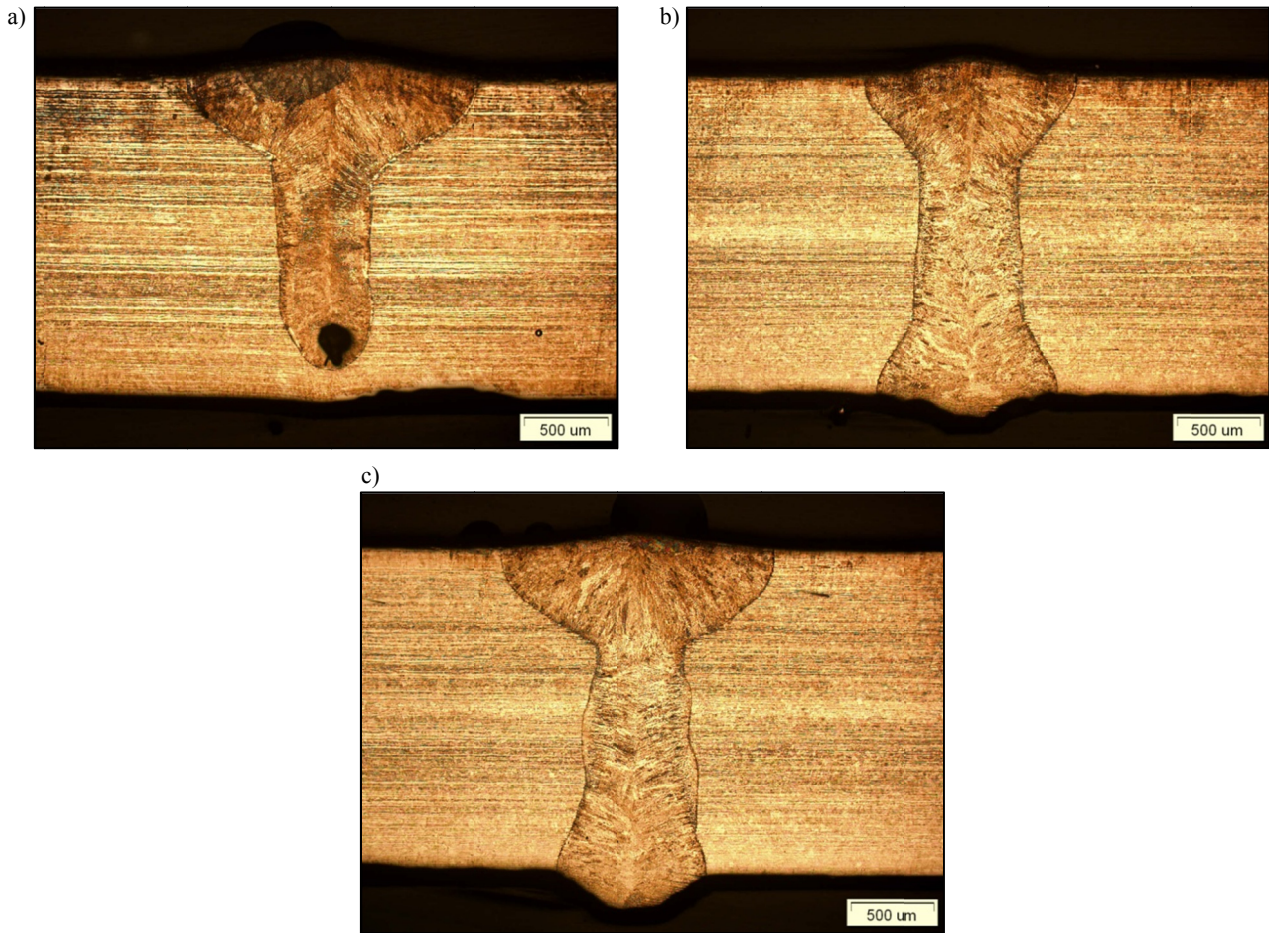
Macrostructure on cross sections of the simulated welds produced on AISI 304 steel sheets 2.0 mm thick by bead-on-plate laser welding at 1.0 kW of output power, welding speed 1.5 m/min, and different focal spot positions (Table 3); a) 1 mm over the top surface, b) 1 mm below the top surface, c) 1.5 mm below the top surface
